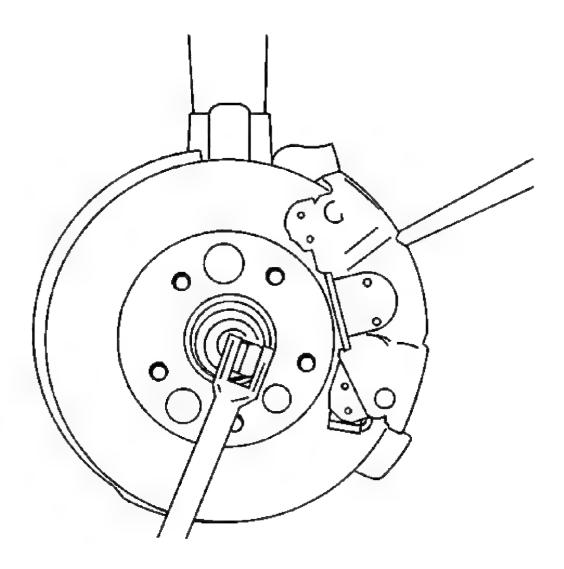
Using Drift To Prevent Rotor Rotation Courtesy of GENERAL MOTORS CORP.
